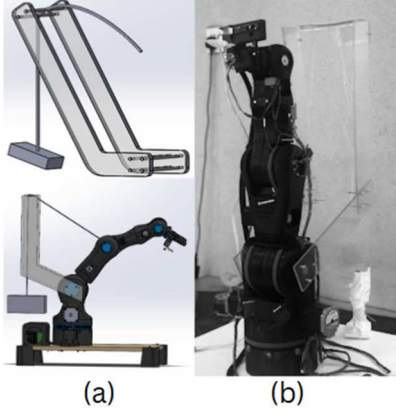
Counter weight mechanism a) CAD models b) Assembled with serial manipulator
